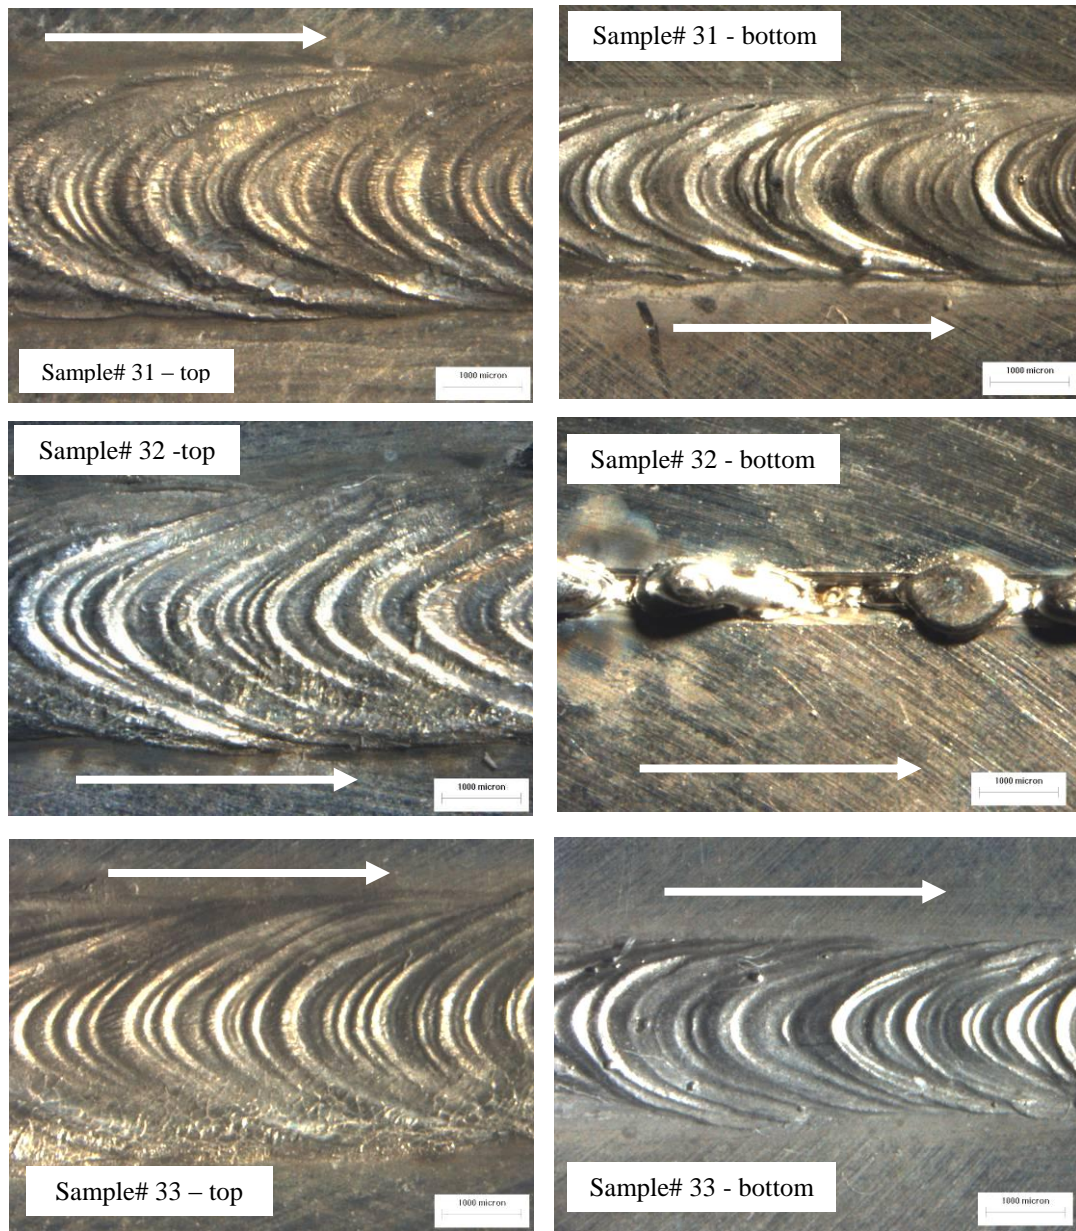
(B) – Top and Bottom Surface Morphology for Laser Welded 6 mm Plates.
